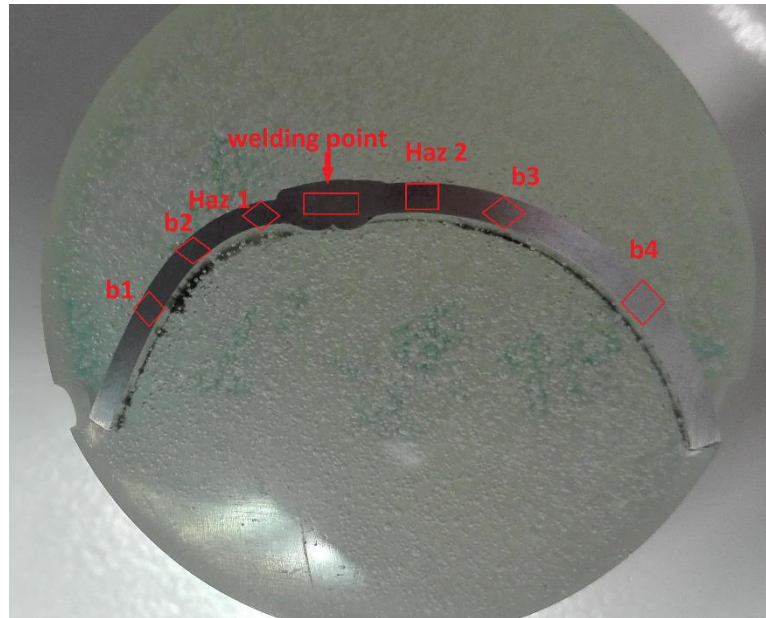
Studied areas of the welding between 7005-T1 and 7005-T6 samples. The left side consist of 7005-T1 material and the right side of 7005-T6.
